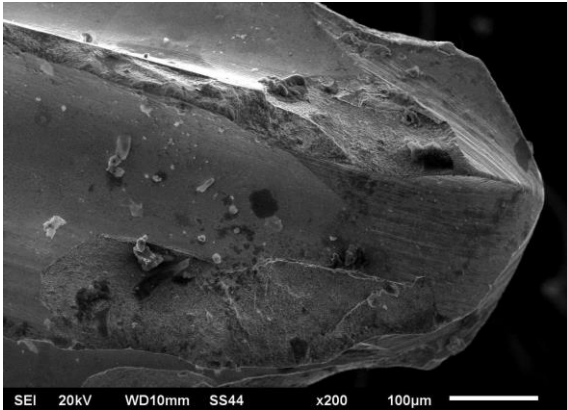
WC-Co dental bur after use: surface of round end taper of bur head
